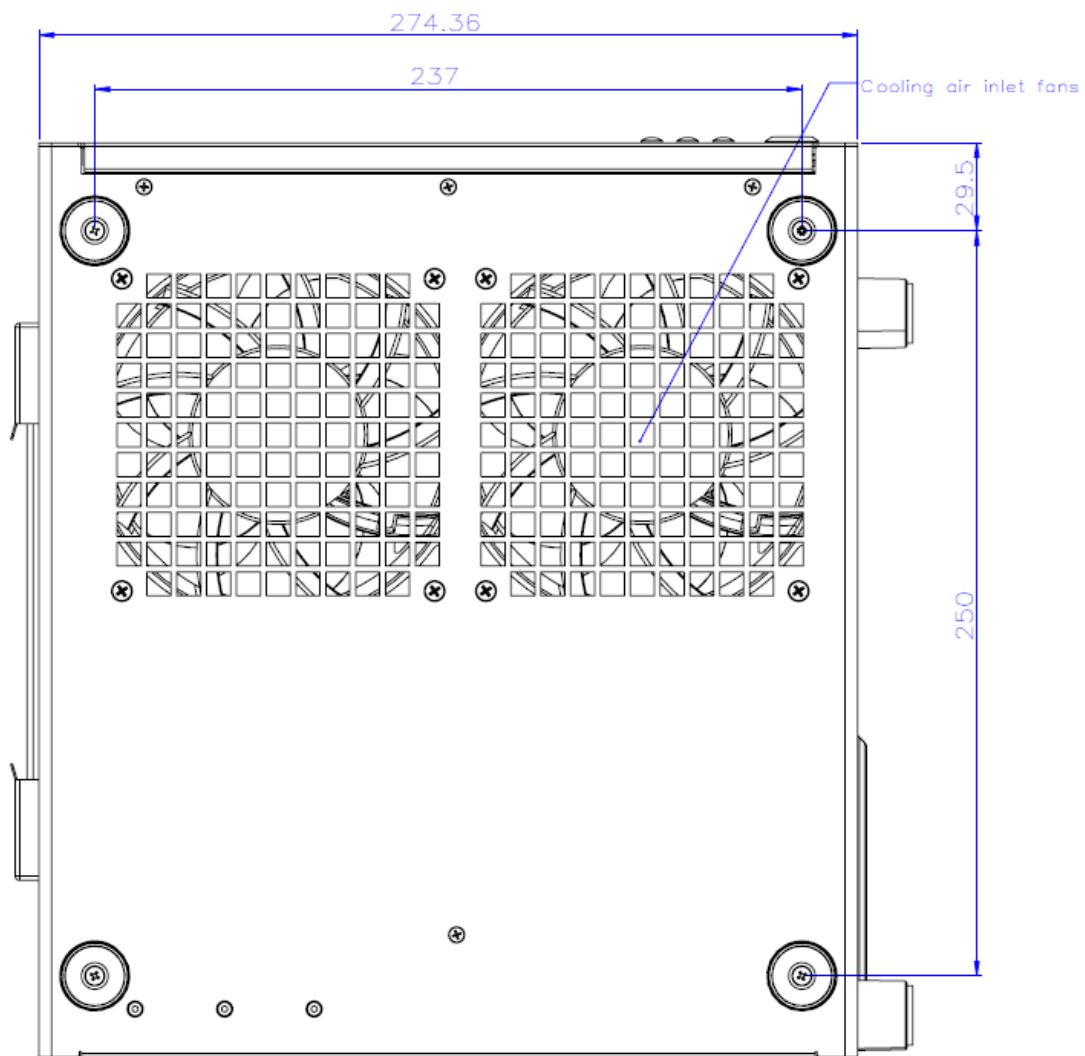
Bottom View (PXle-2519 Gen 3/Gen 2)
